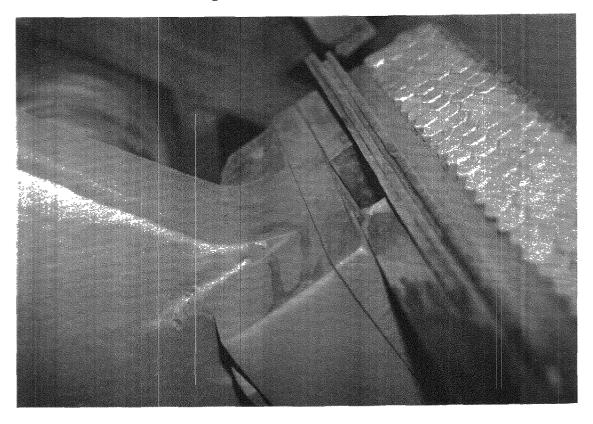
Piece of Housing Wear Plate Jammed in Throat Port
